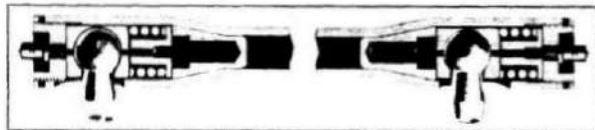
To adjust the joints at the ends of the steering connecting rod, draw each adjusting plug tight and then back it off one cotter pin hole.
